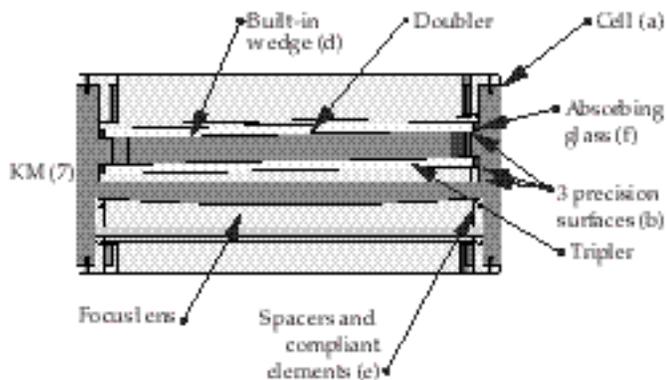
The final optics cell, includes the following features: (a) A stiff and stable one-piece cell for mounting and referencing all the optical elements. (b) Three precision surfaces for mounting the optics. (d) A built-in wedge of 10 mrad, between the lens and the crystals. (e) Spacers and compliant elements to load and hold the optics in the cell. (f) Absorbing glass, which also suppresses stimulated Raman scattering. The final optics cell will be kinematically mounted to the actuation system with three ball-and-vees. (40-00-1097-2270pb01)
